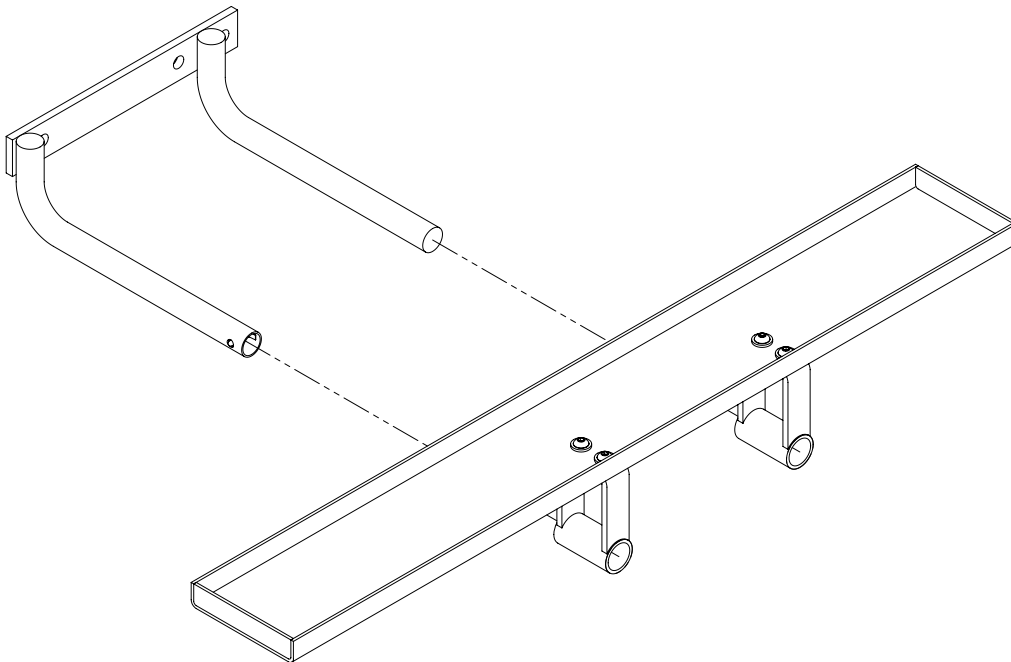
Attaching Wheel Track to Wheel Bracket.
